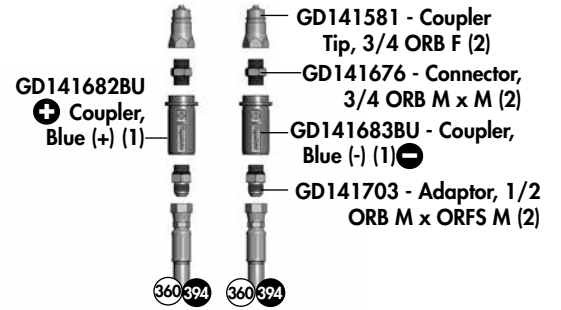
Detail B - RH Wheel Cylinder Hydraulic Lock Kit
